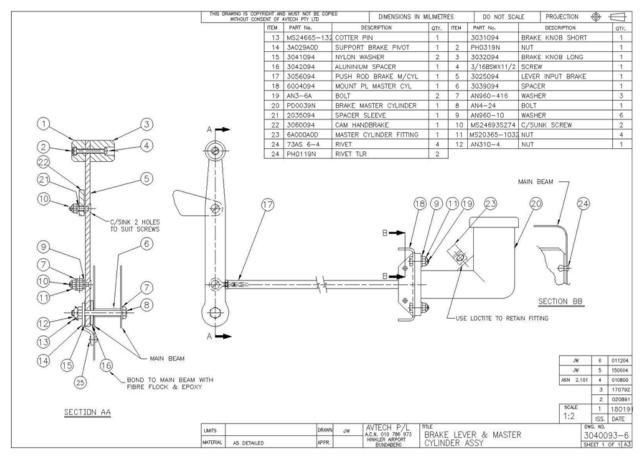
Brake Master Cylinder & Lever Assy (Type 1)
